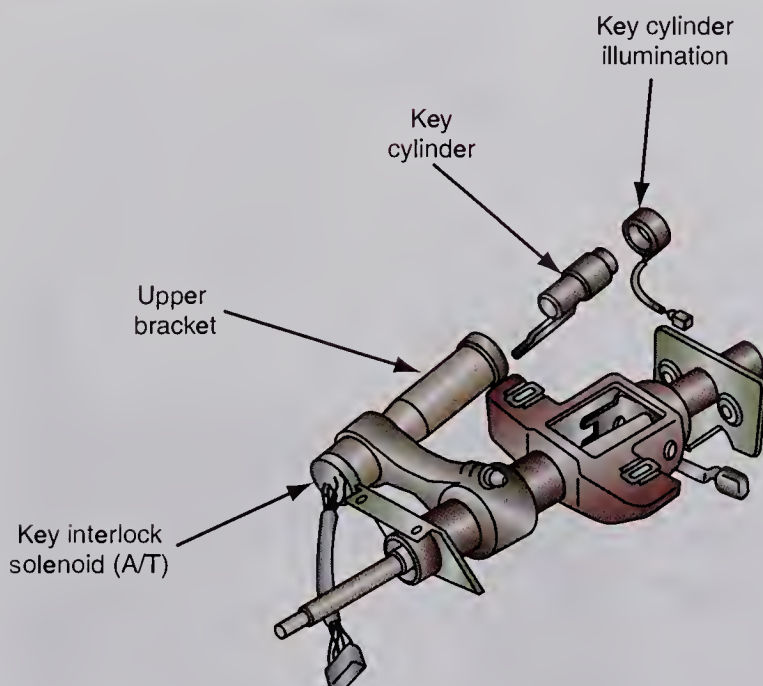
Ignition key cylinder illumination mounted above ignition switch cylinder.
